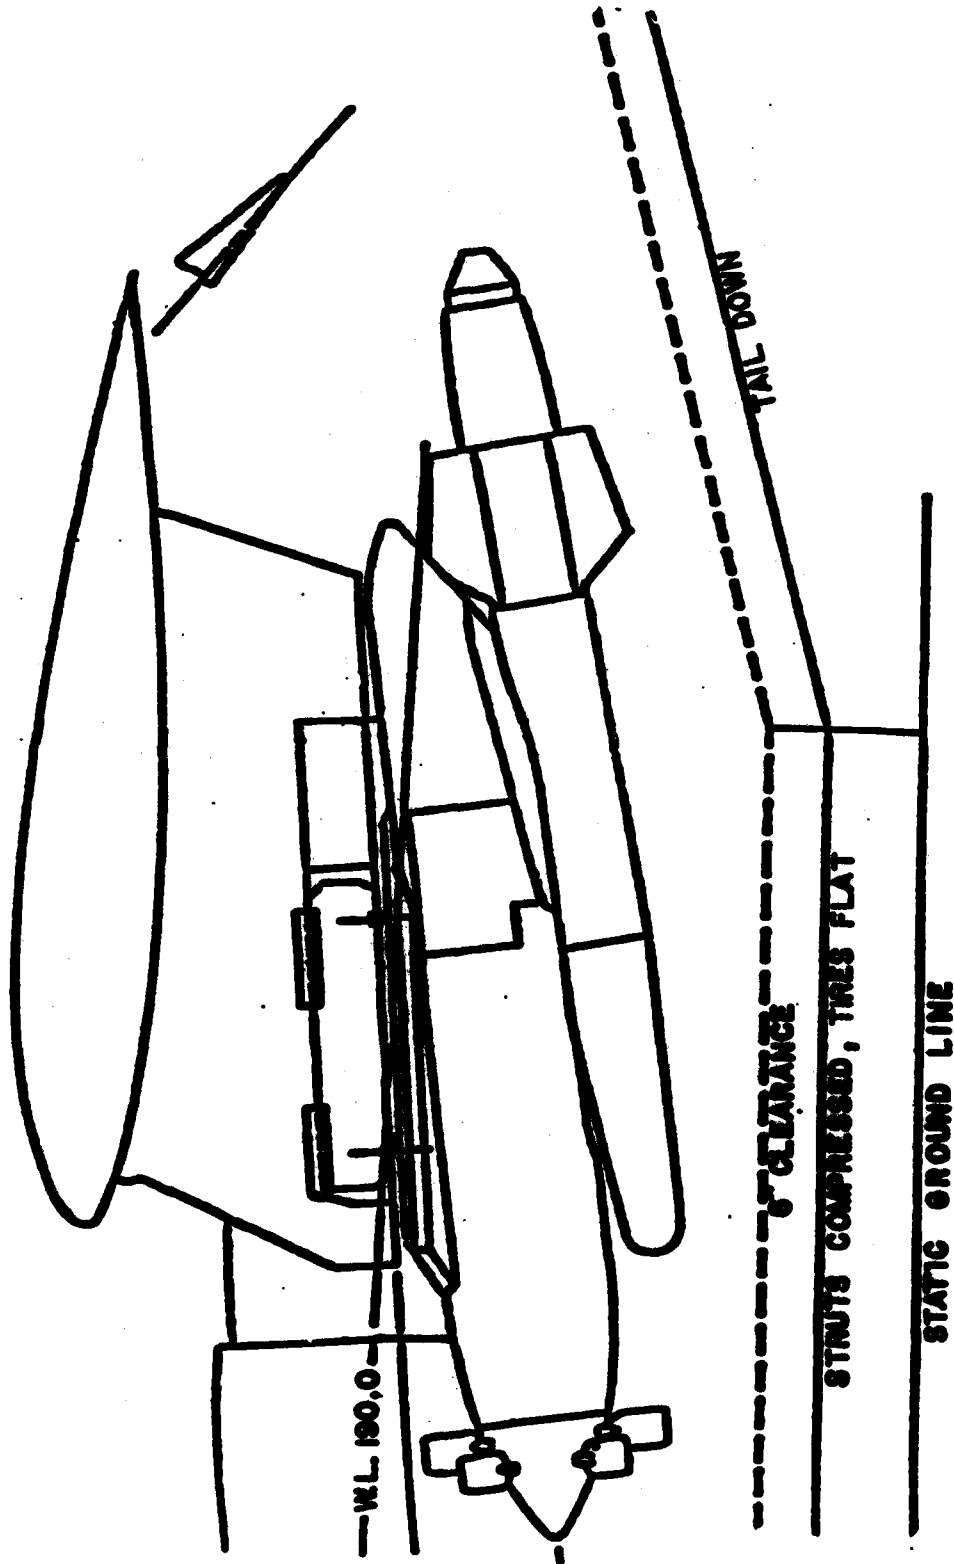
S-3 NSTTS INSTALLATION, SIDE VIEW
